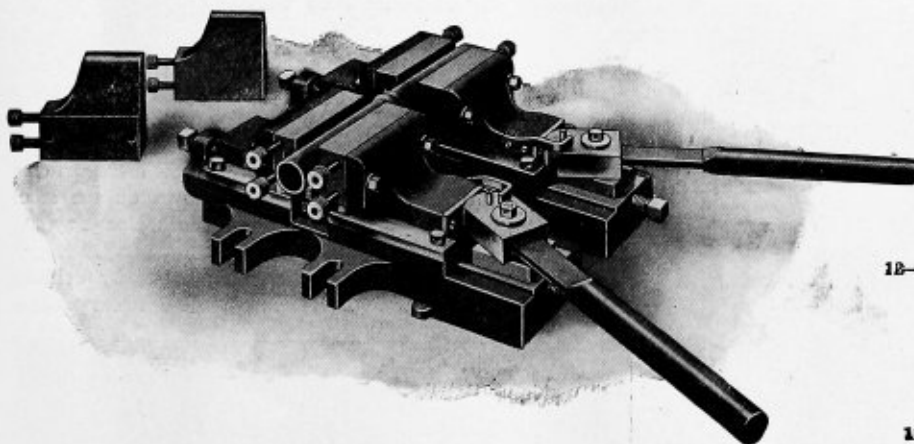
Clamps on Electric Tube Welding Machine
